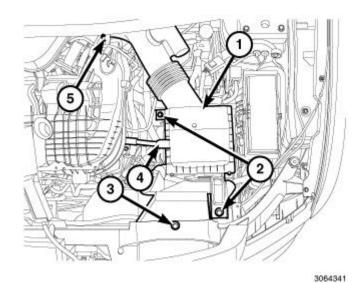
Fresh Air Makeup Hose, Air Cleaner Body, Push Pin, Two Bolts & Clamp Courtesy of CHRYSLER GROUP, LLC
